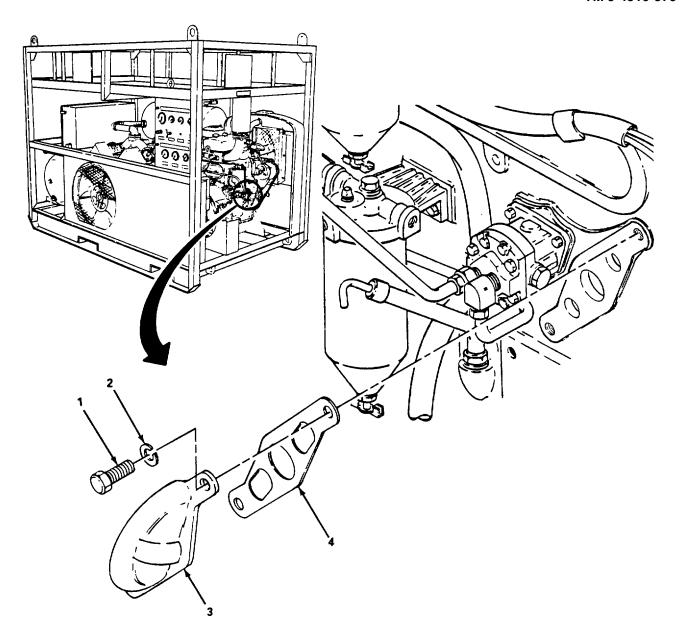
Oil Cooler By-Pass Valve, Replace
